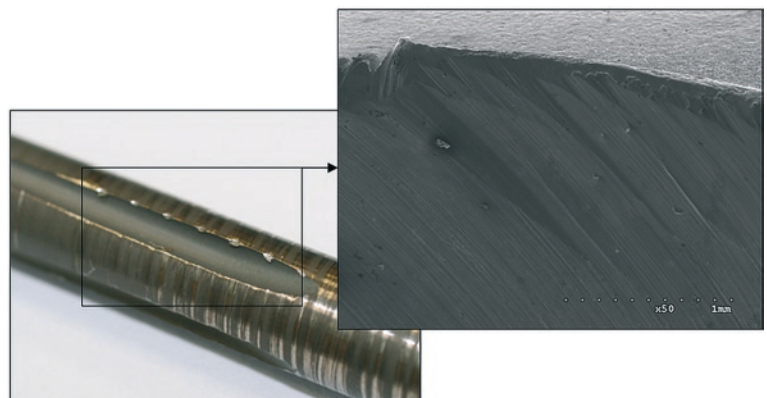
View of damaged reconstruction screw surface, mag. x50.
